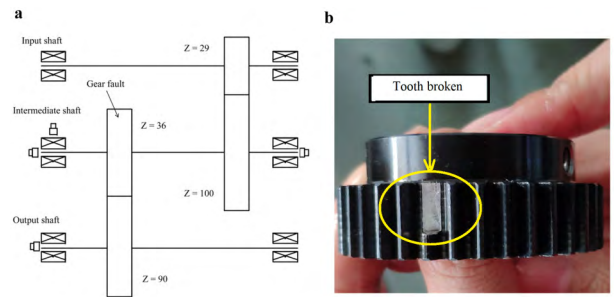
(a) The inner structure of the gearbox, (b) gear tooth broken fault.
